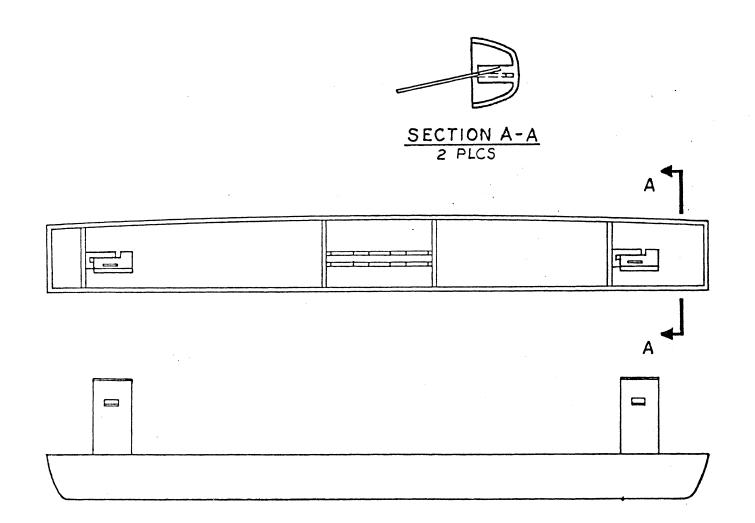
SPACE BAR & GUIDE ASSEMBLY
